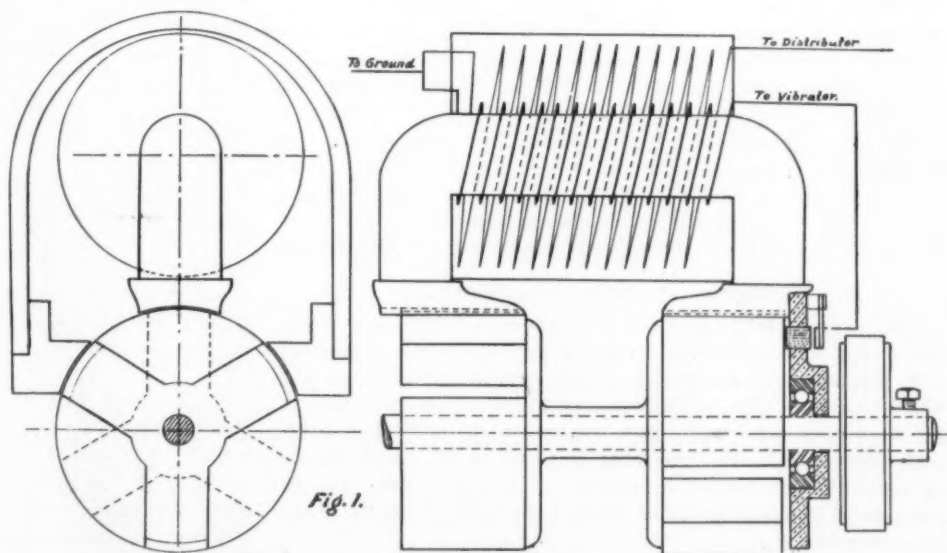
End and side elevations of the new Miller magneto, showing disposition of the windings.
